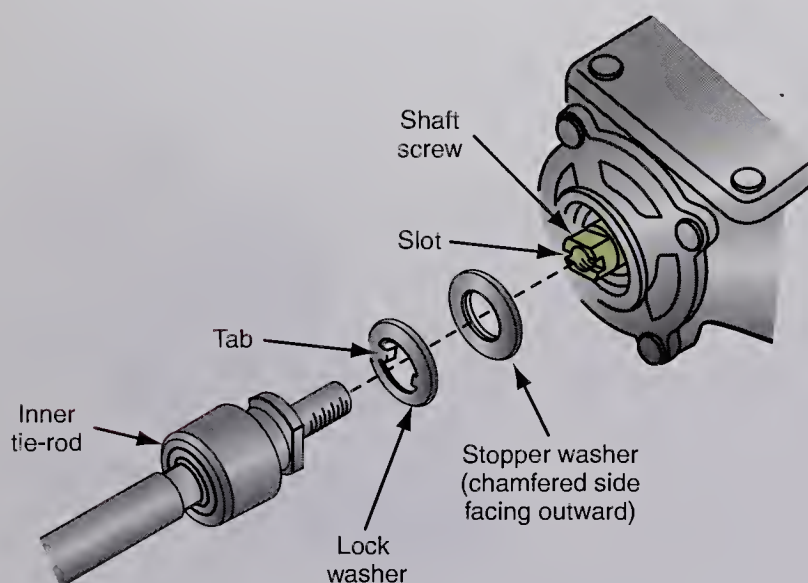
Installing the inner tie-rod end on the shaft screw.
